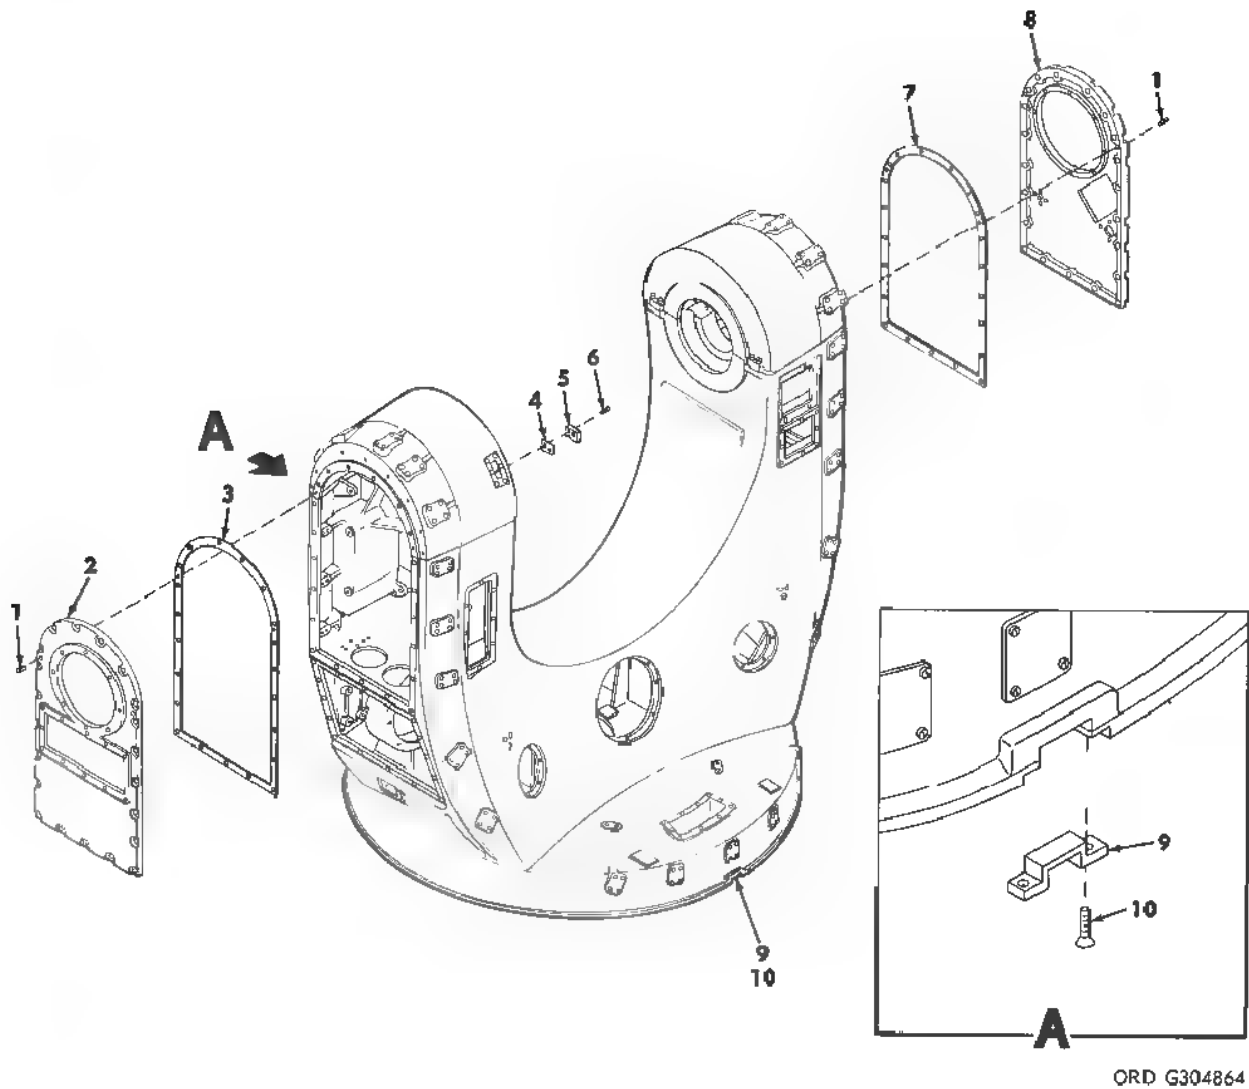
DRIVE /8170973/-PARTIAL EXPLODED VIEW
